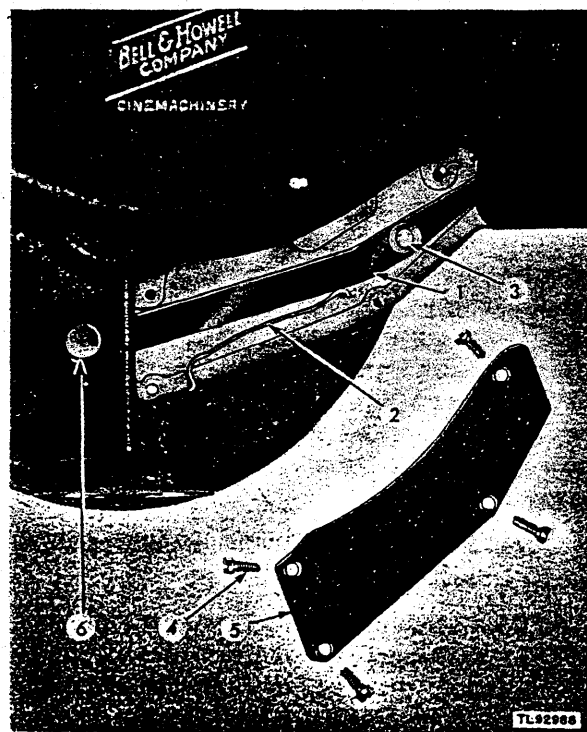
Disassembly, operating lever and lock, and magazine belt drive pulley, Camera PH-330-G.
